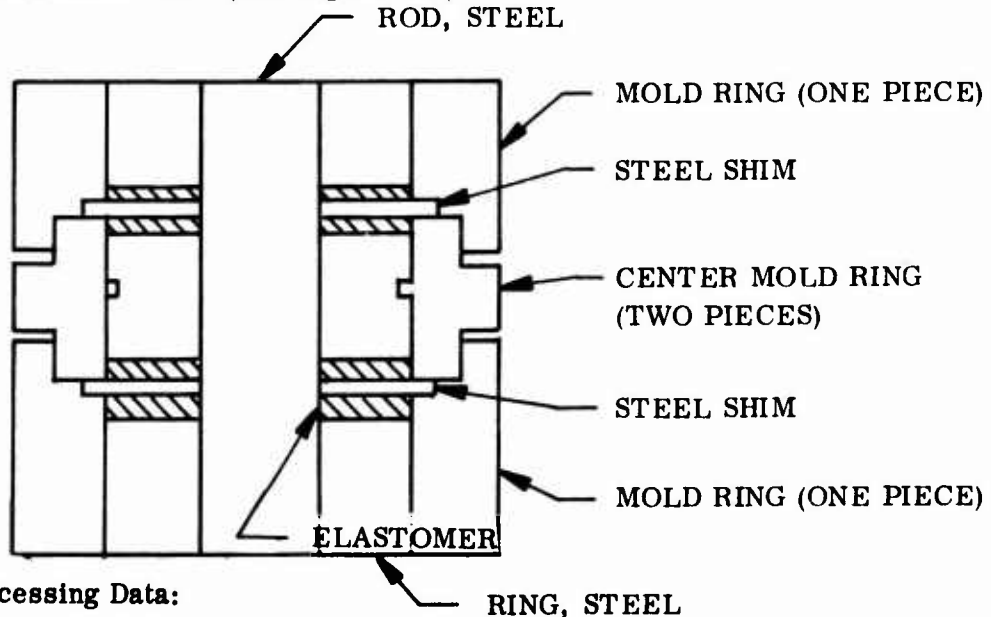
Mold Tooling for Type I R2 Service Life Bearing
